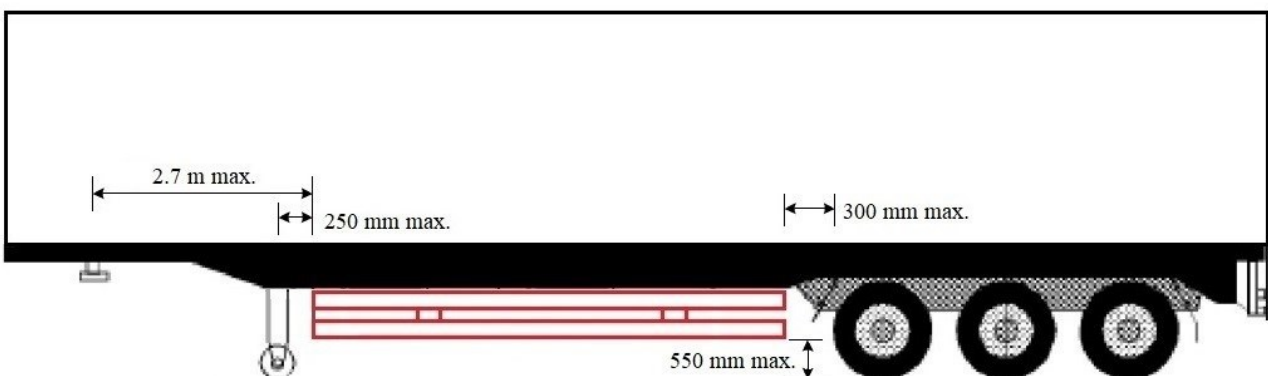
Illustration (side view only) of a semi-trailer fitted with horizontal rails/members as LPDs for side underrun protection, including key UN R73 dimensional limits
